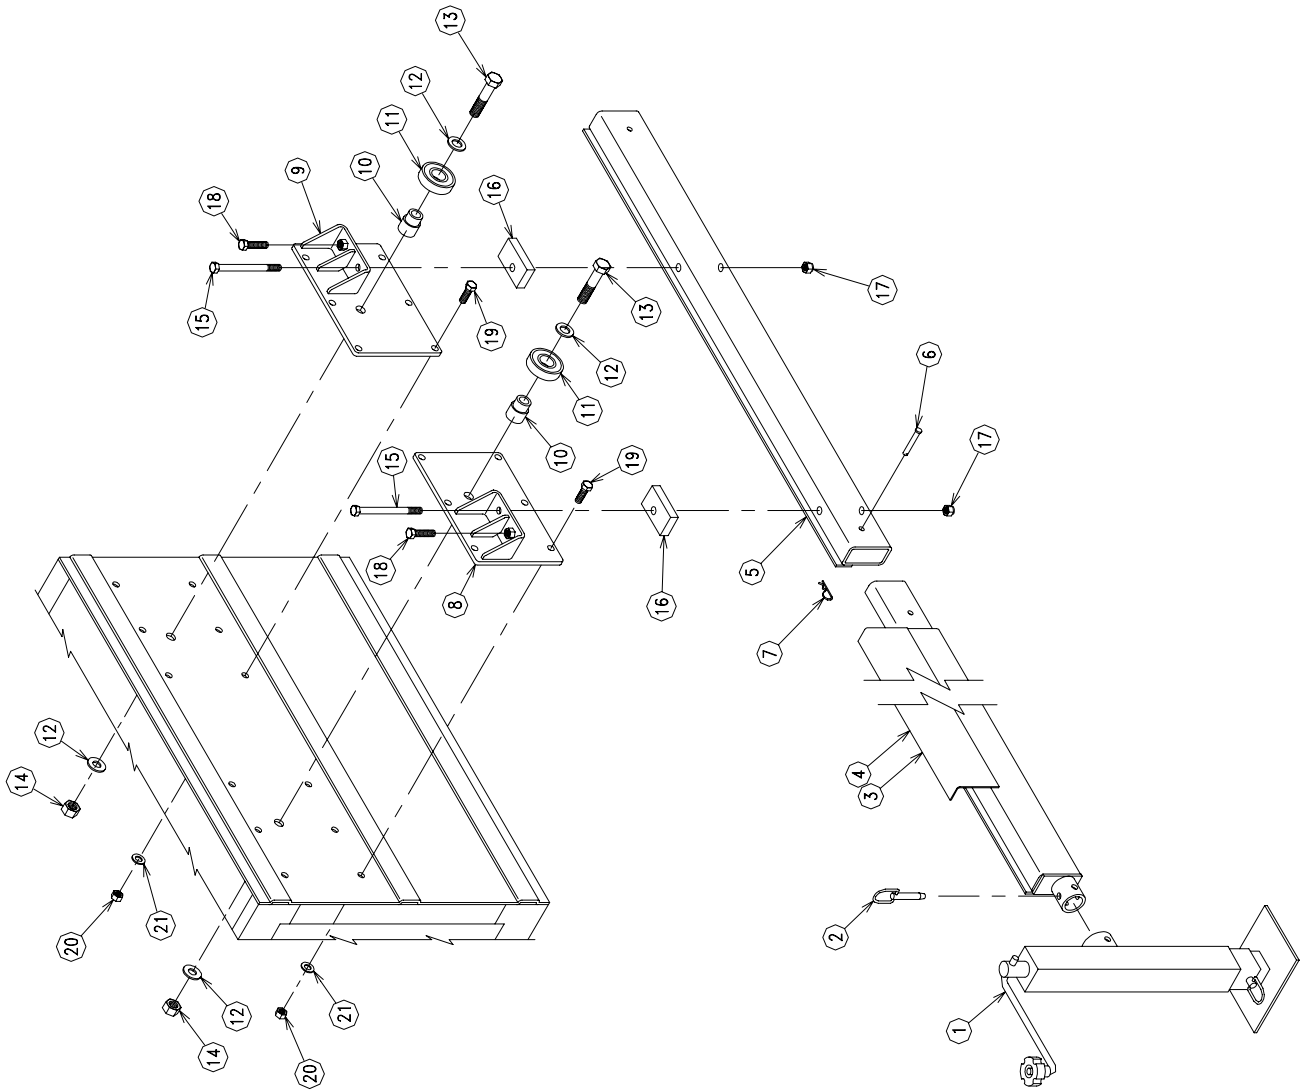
Roll Out Kit #1508 Mounting Details (Drawing #12230B_P3)
